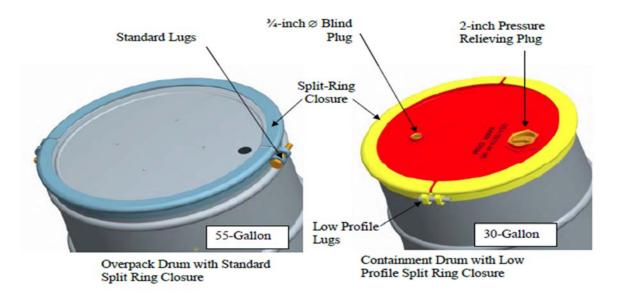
Split-Ring Closure Installed on 30- and 55-Gallon Drum Assemblies
